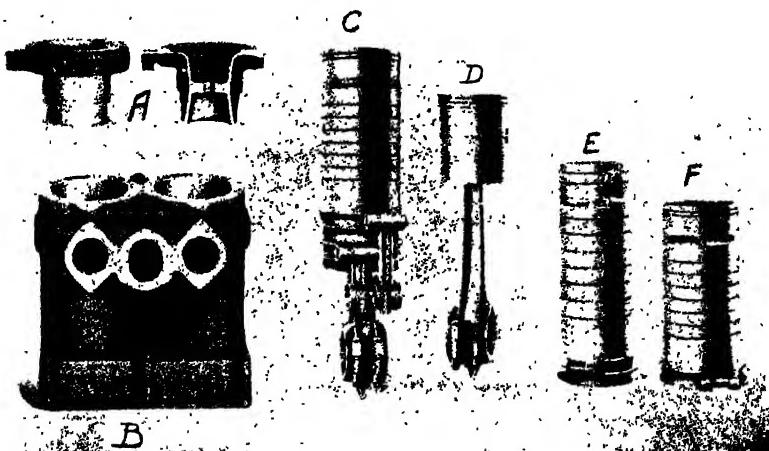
Parts of Sleeve Valve Cylinder Assembly.
